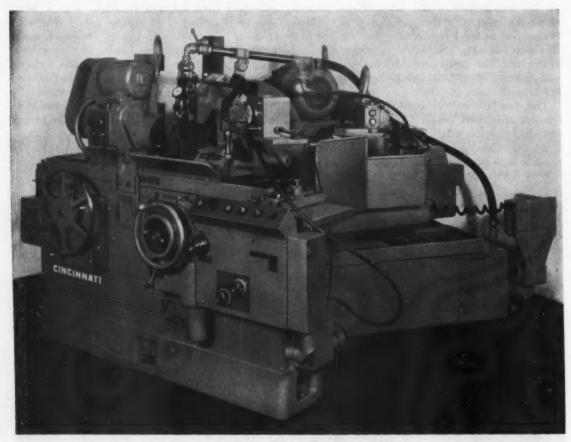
Angular wheel-slide grinding machine built by the Grinding Machine Division, Cincinnati Milling Machine Co.
